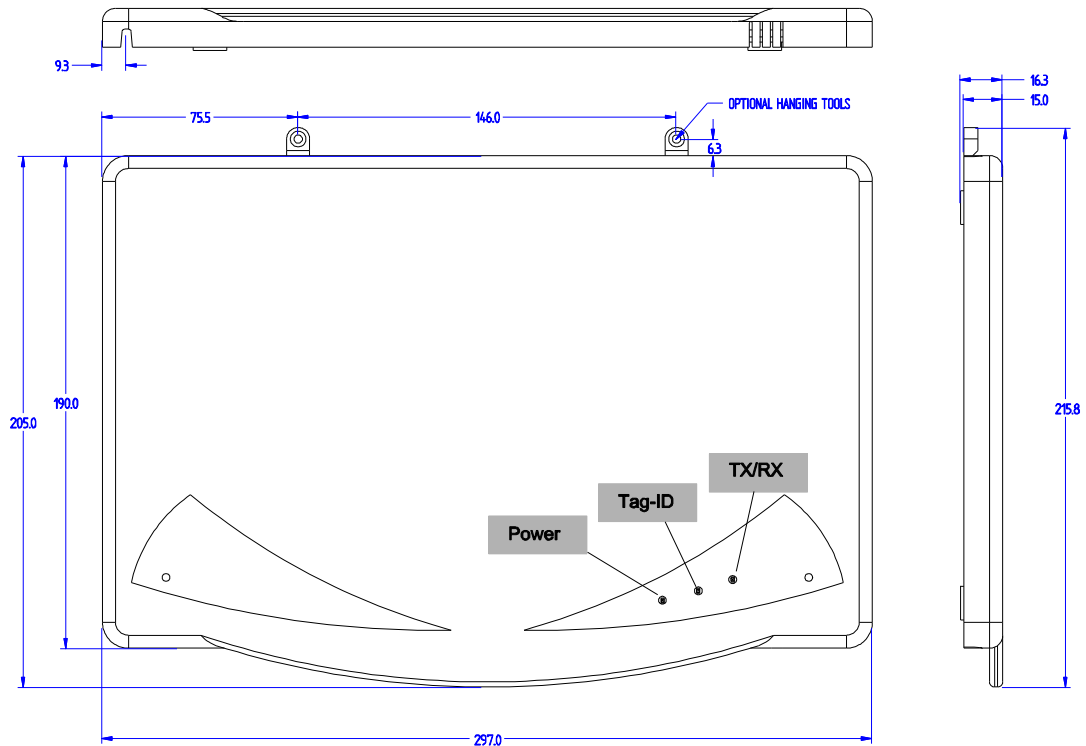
Slate R1260E/EB Technical drawings: top view
